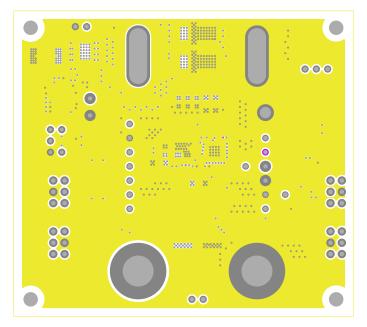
PCB - Inner Layer - Layer 2 (Top View)
